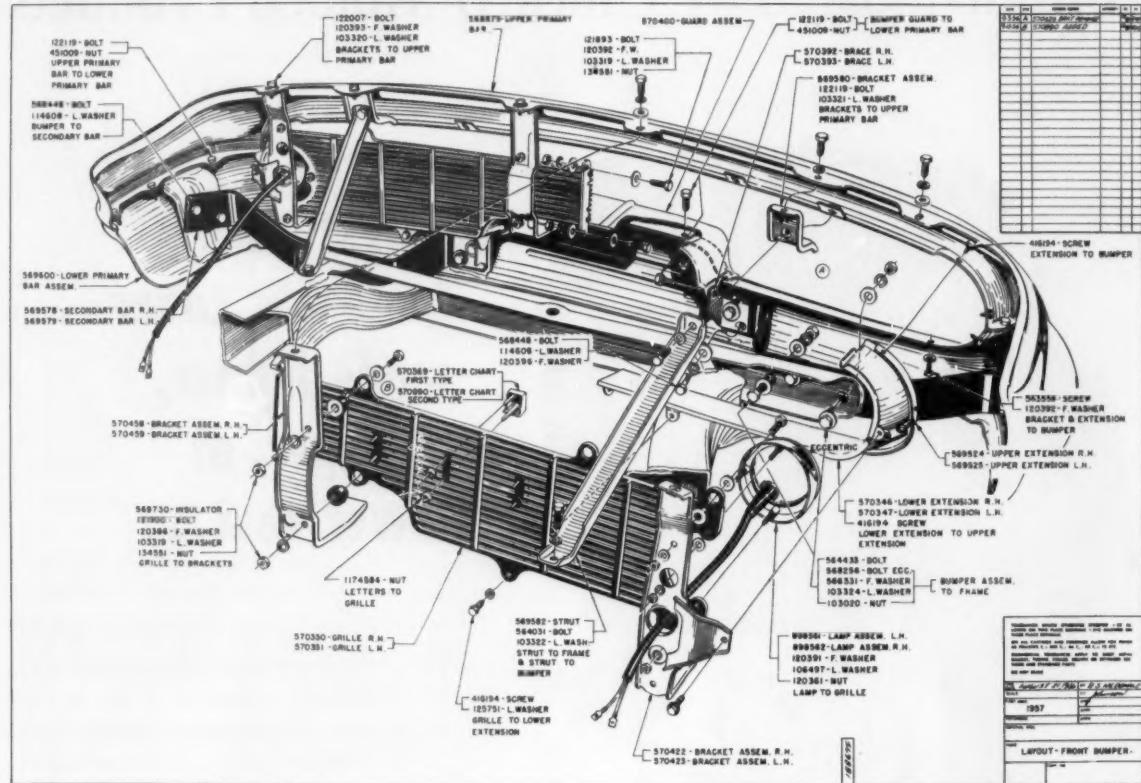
Example of graphic illustration which can effectively replace orthographic drawings. Item illustrated here is an automobile bumper assembly.
